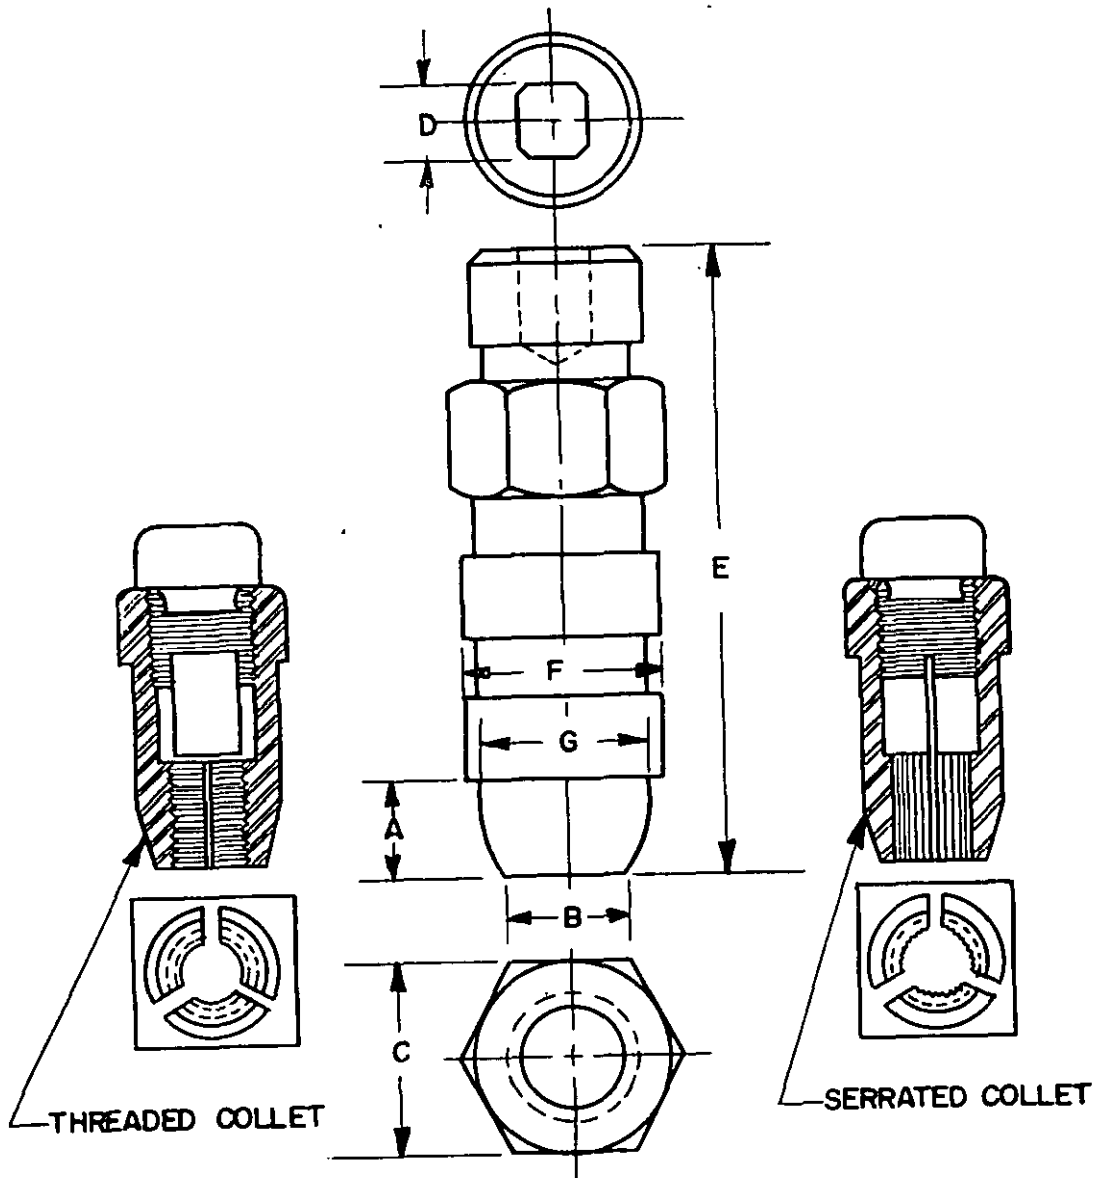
Type I, design C, style c, collet grip, housing with drivescrew, short nose.
